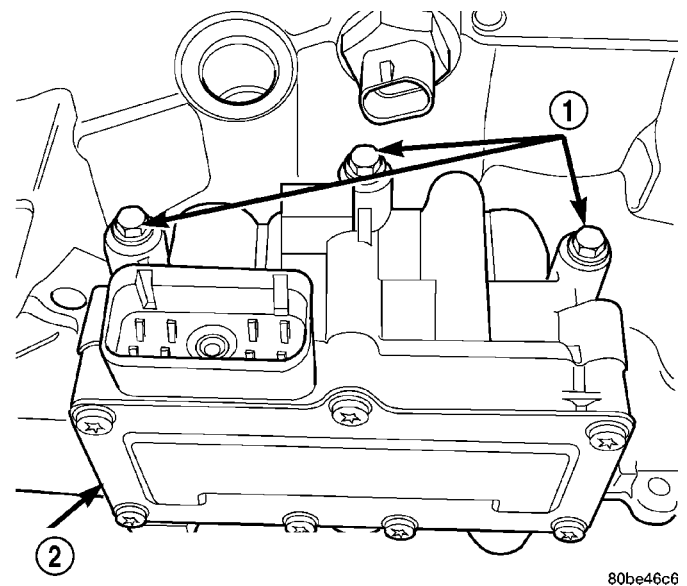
Solenoid/Pressure Switch Assembly-to-Case Bolts
